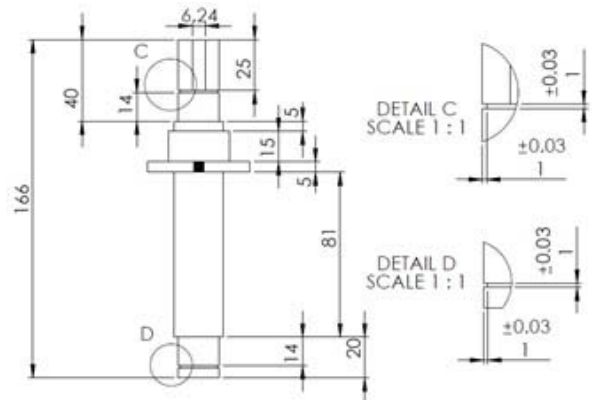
Design shaft of 12S-14P OR-HEFSM (All units in mm).
